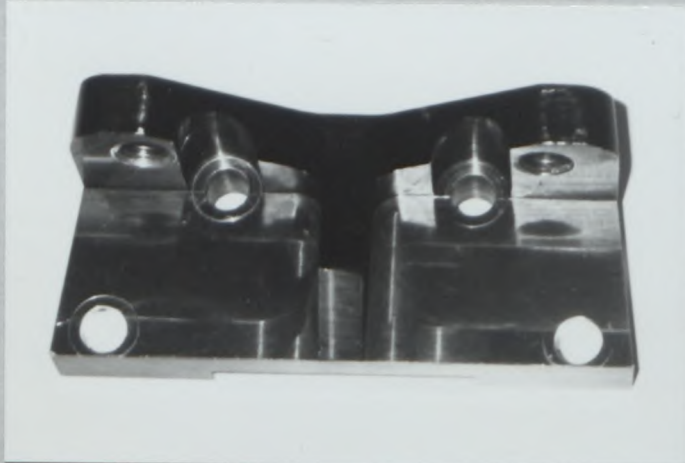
FRONT AND/OR REAR REINFORCED
